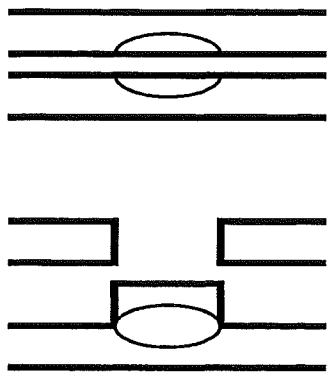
Two types of weld failure: interface failure (above) and plug failure (beneath).
